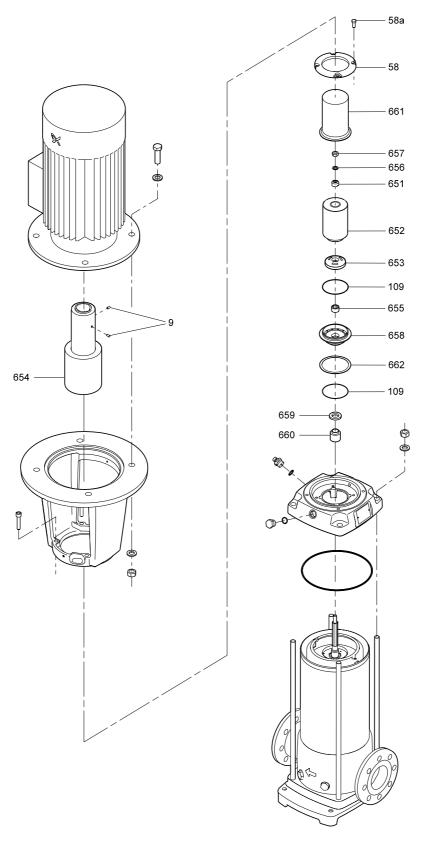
Exploded view, CRN 32, 45, 64, 90
